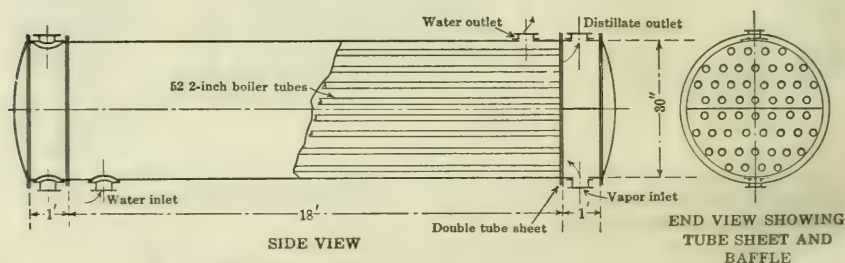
Thirty-inch rerun condensers, Trumble plant at Vernon. Left, side view; right, end view showing tube sheet and baffle. Outside surface of tubes, 489.5 square feet; inside surface of tubes, 442.7 square feet.
